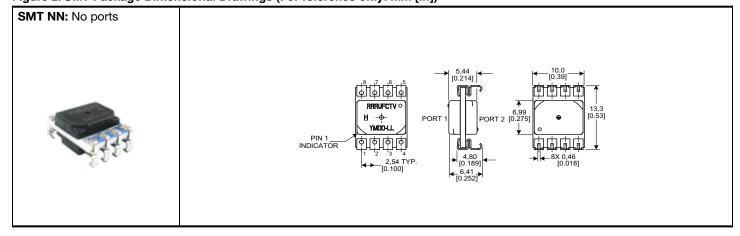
SMT Package Dimensional Drawings (For reference only: mm [in])
